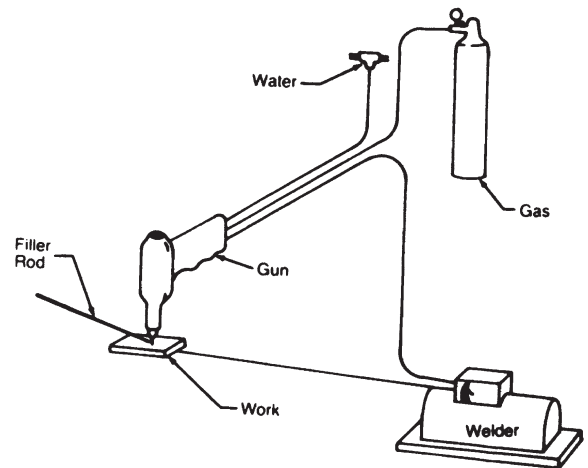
Inert-gas shielded tungsten-arc welding (TIG)
